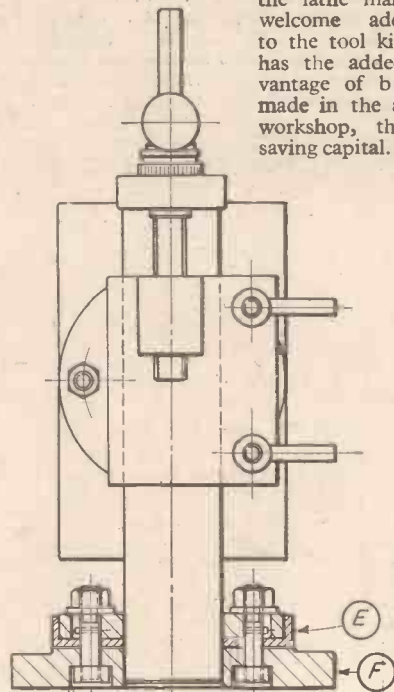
Assembly drawing of a typical fabricated slide for an average 3 1/2 in. lathe. Some of the lettered parts are shown separately in individual drawings.
